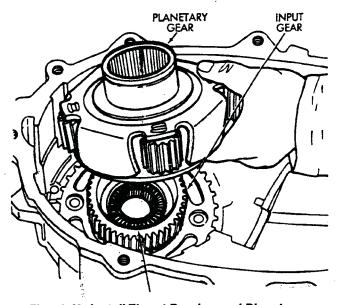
Install Thrust Bearing and Planetary Gear
